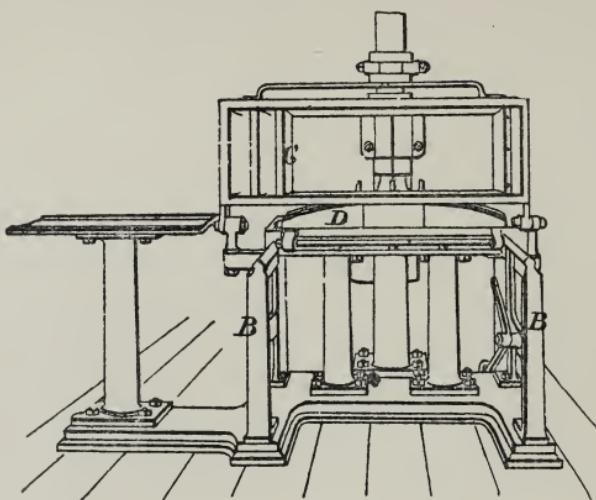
OIL-CAKE MOULDING MACHINE.
